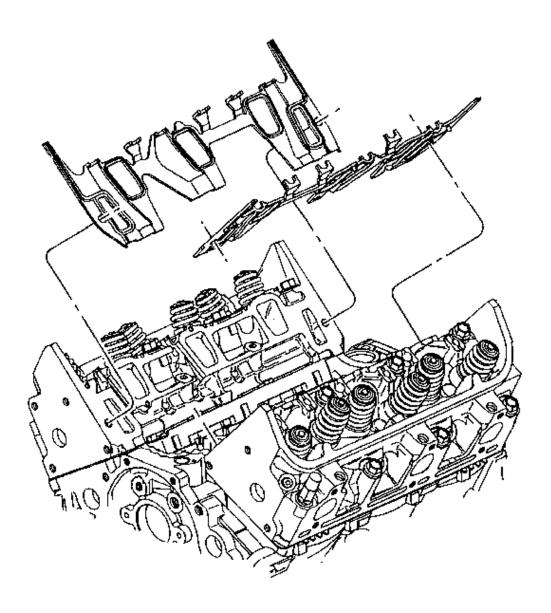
Installing Lower Intake Manifold Gaskets Courtesy of GENERAL MOTORS CORP.
